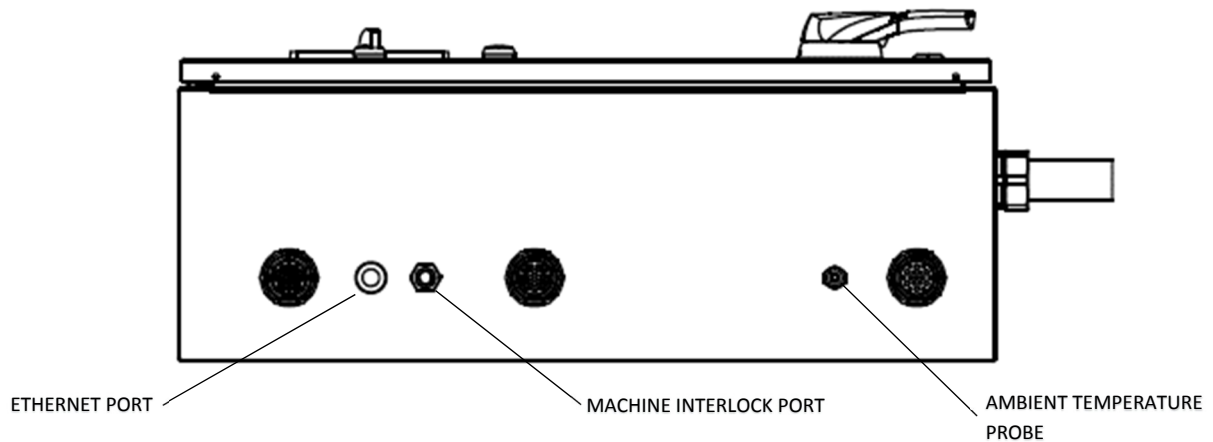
Electrical Enclosure Bottom View (Inside Chiller)
